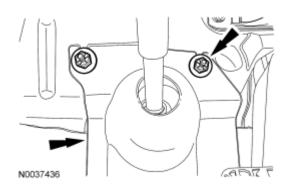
Locating Steering Joint Cover And Nuts Courtesy of FORD MOTOR CO.
